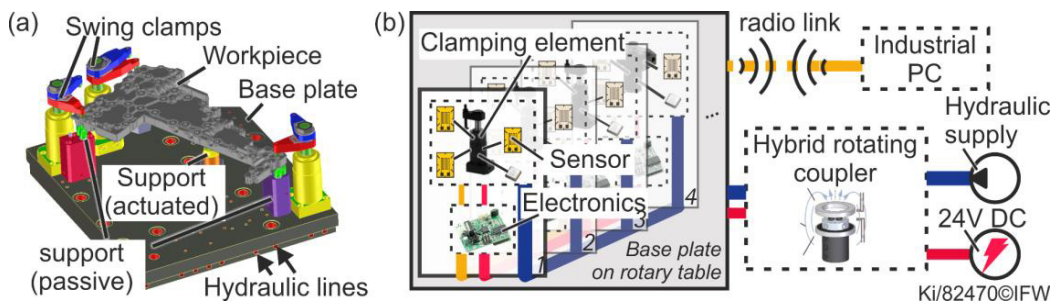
(a) Hydraulic clamping fixture; (b) Overall concept for the sensory clamping system.
